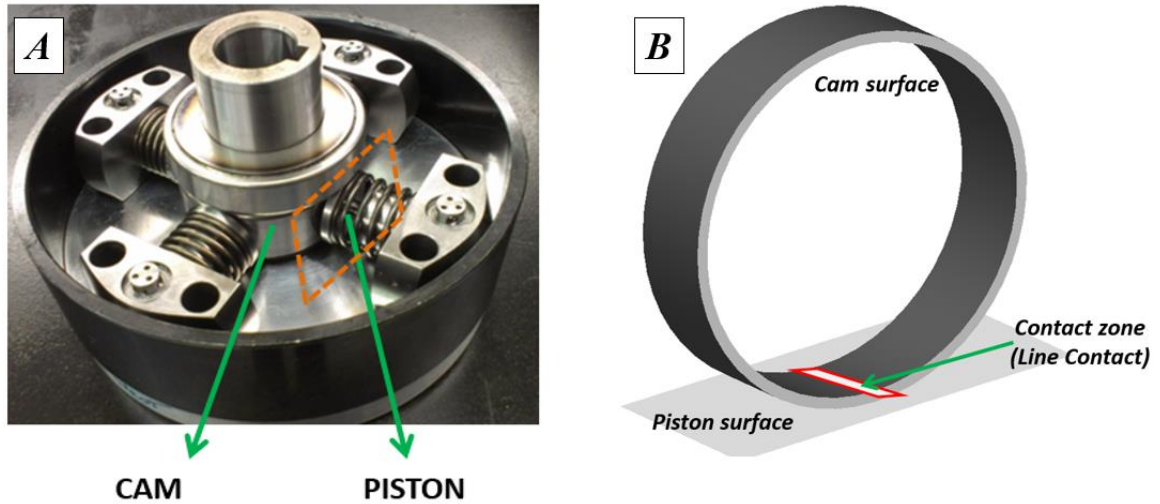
(A) Cam/Piston interface on the reference pump and (B) Illustration of the cam and piston surfaces causing a line contact.
